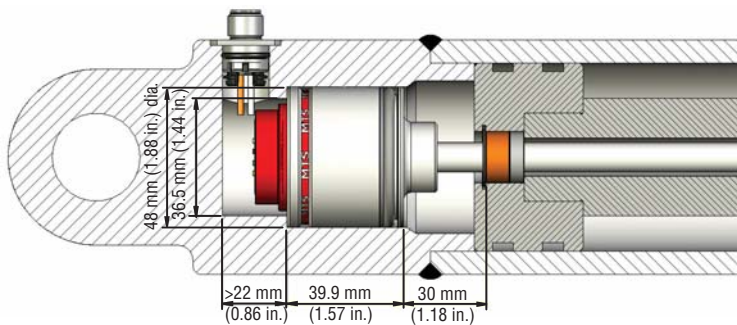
M-Series Model MT rod-style sensor mechanical installation example
